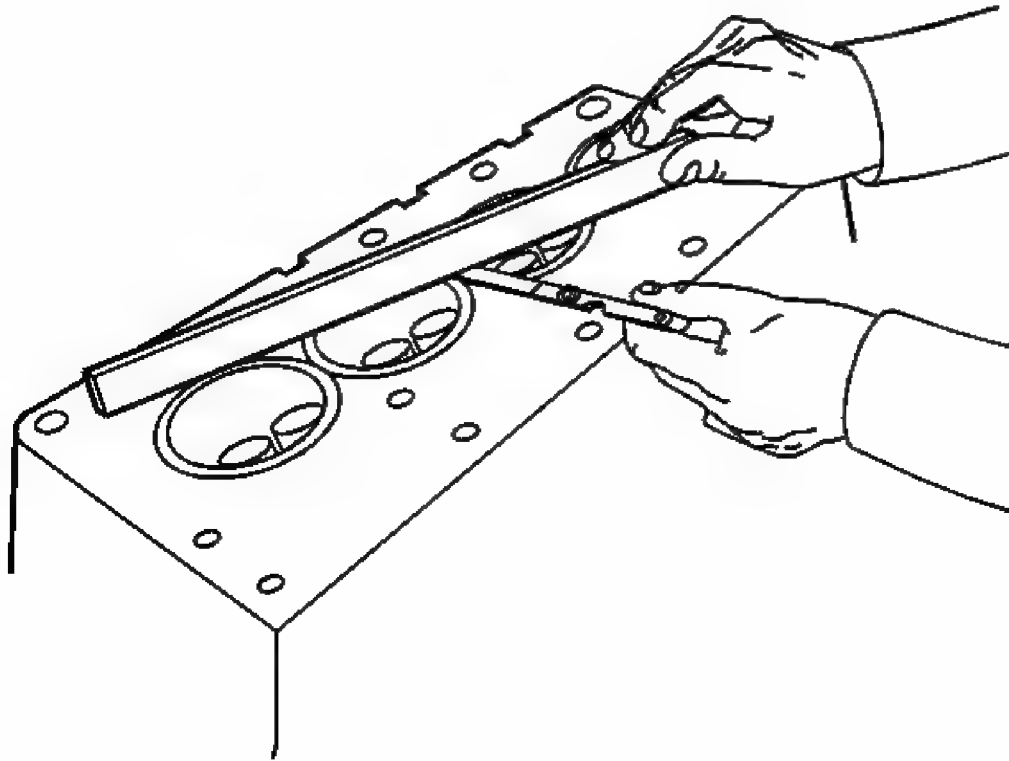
Inspecting Cylinder Head For Warpage
